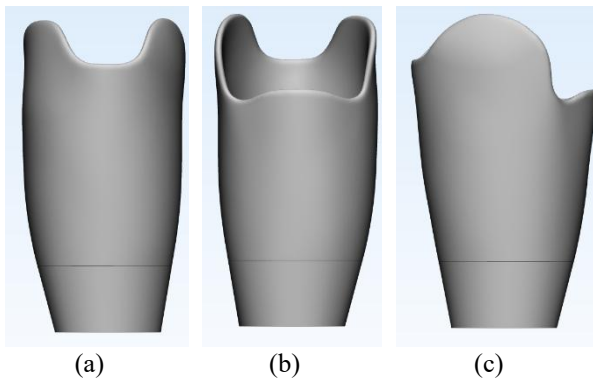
(a) Front view, (b) back view and (c) side view of socket
